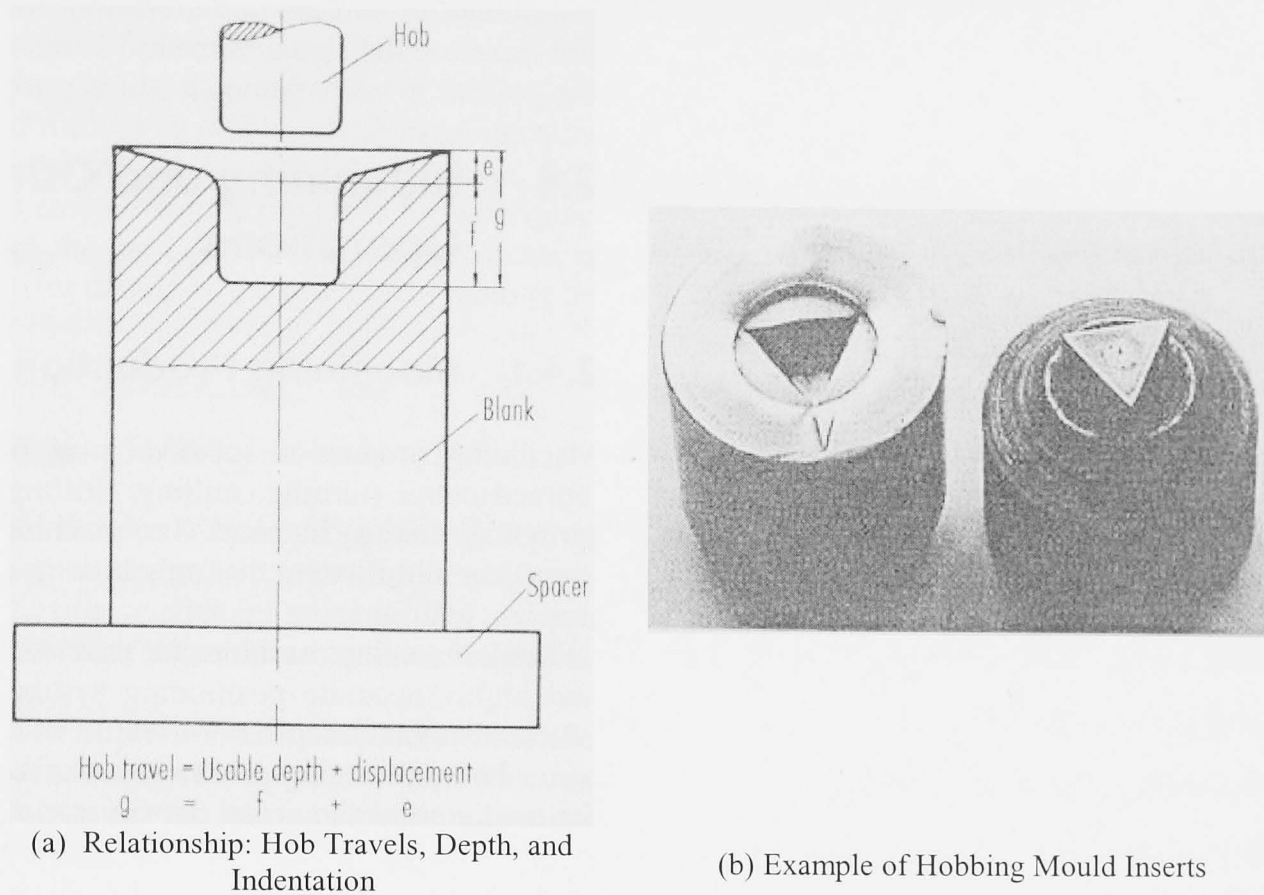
Hobbing Mould Inserts [Menges, 2000]
